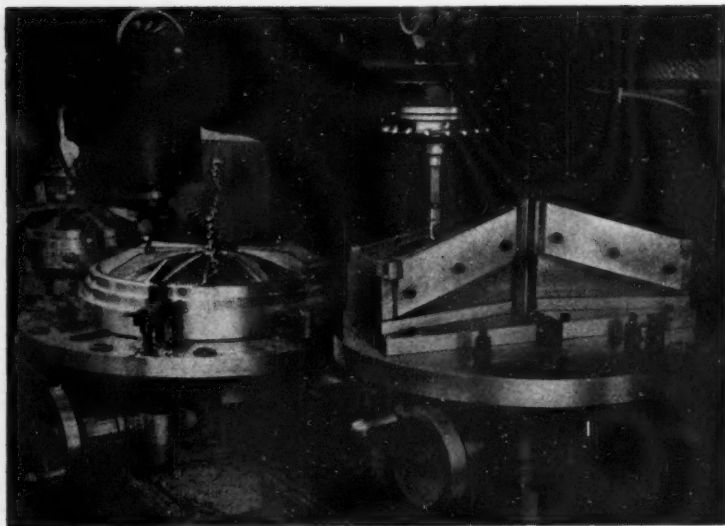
Close-up view of the set-up on a large Hydro-Tel milling machine for producing 12 propellant cavities in the convex side of each of two injector plates, simultaneously. The arrangement of the two templates required is clearly shown
